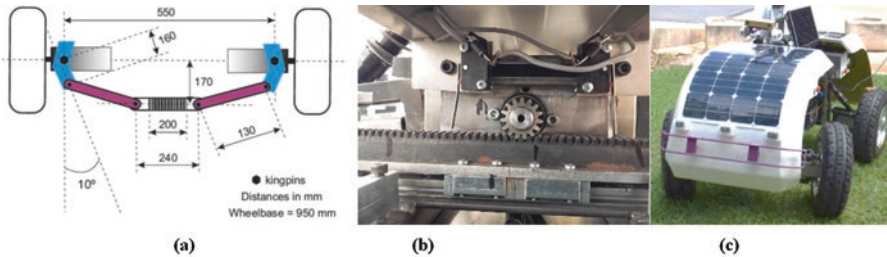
Steering design in scouting robots: (a) tie-rod assembly; (b) pinion-rack actuation; (c) caster angle
